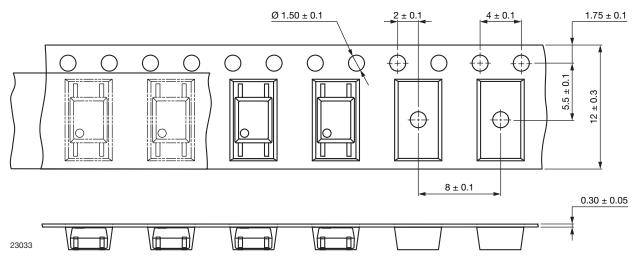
Tape and Reel Packaging (3000 pieces on reel)
